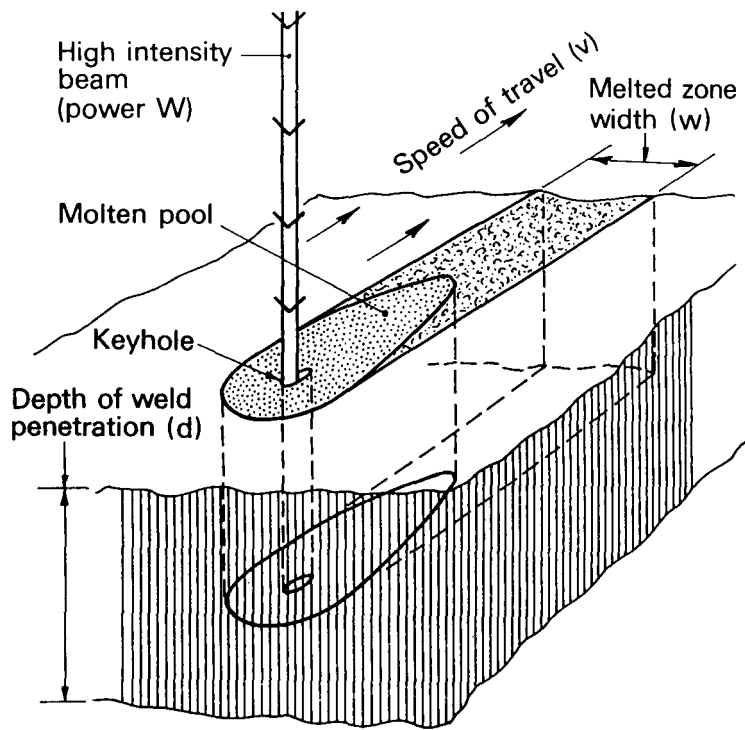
Schematic diagram of the keyhole welding process for beam power, W , welding speed, v , weld bead width, w and depth of penetration, d . The welding direction is that of the workpiece relative to the laser⁽³¹⁾.
